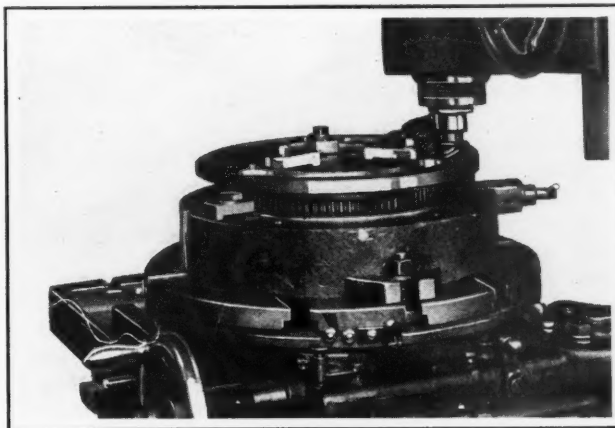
Milling Grooves in Cams shown in Fig. 2
